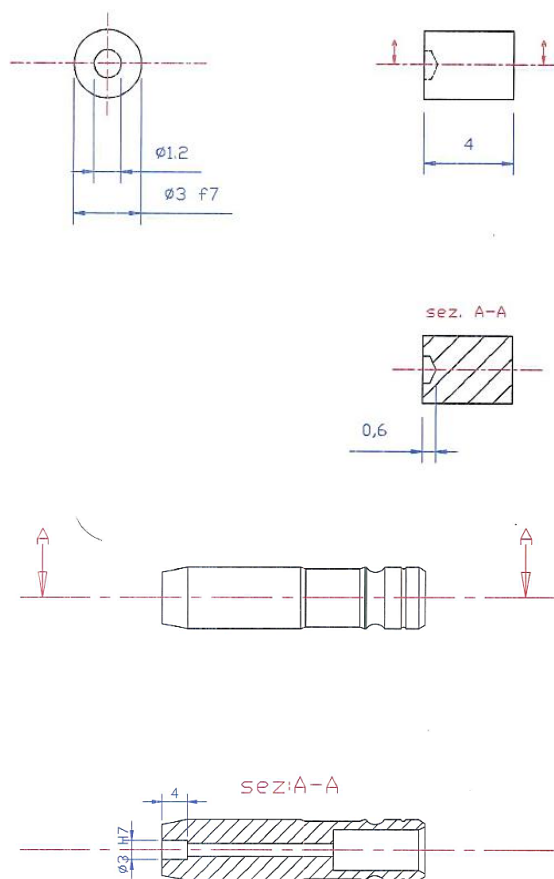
5 Technical drawing of the Cu inserts and the modified aluminium holder.
